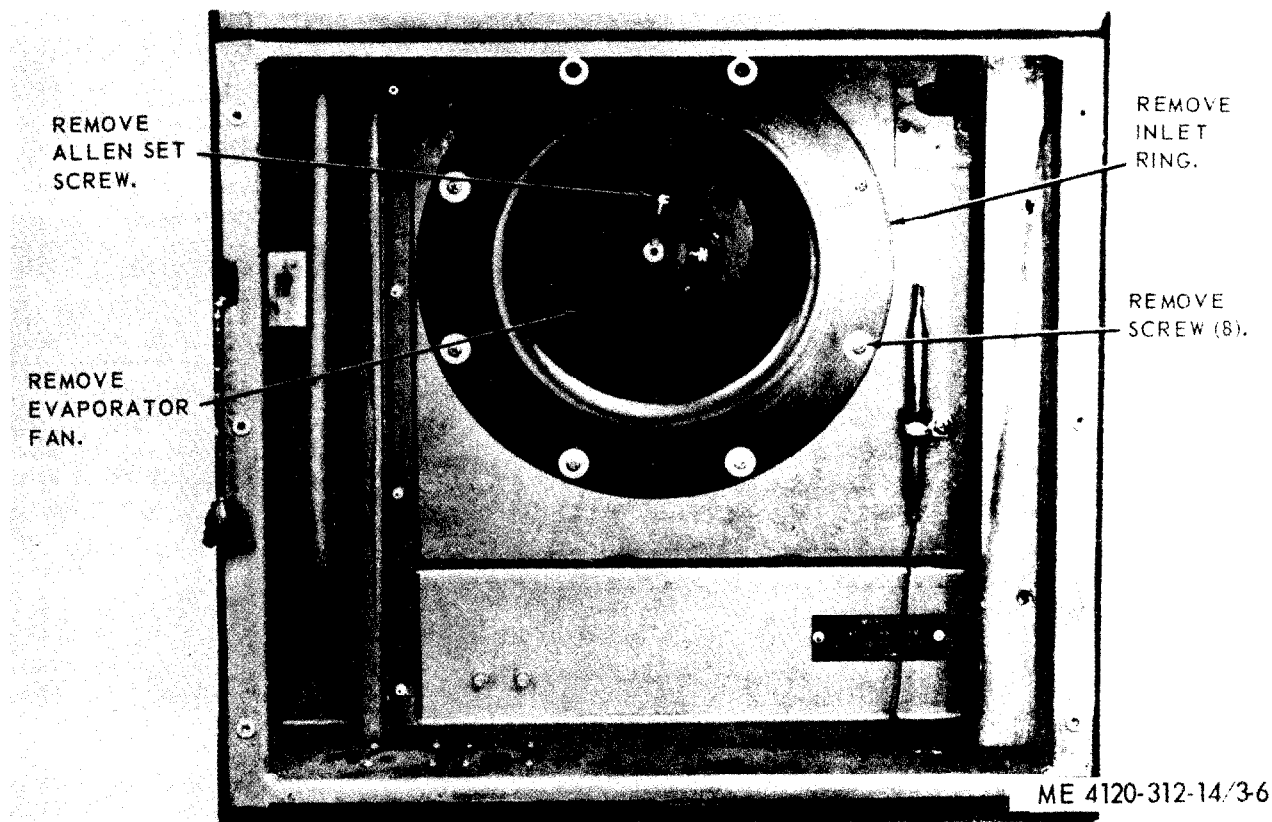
Evaporator fan and inlet ring, removal and installation.
